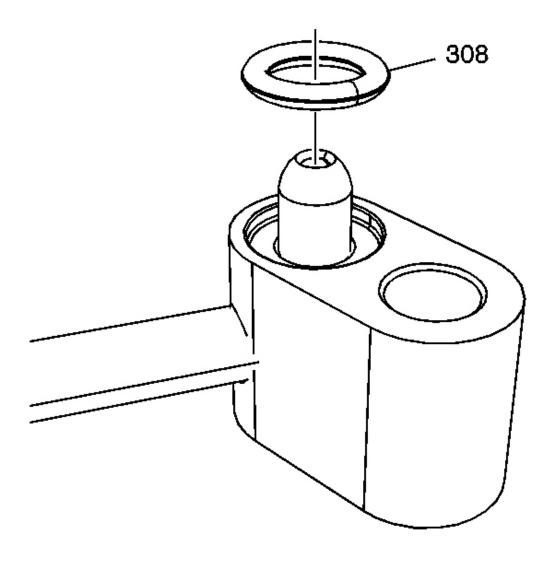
View Of Coolant Air Bleed Pipe Seal Courtesy of GENERAL MOTORS CORP.
